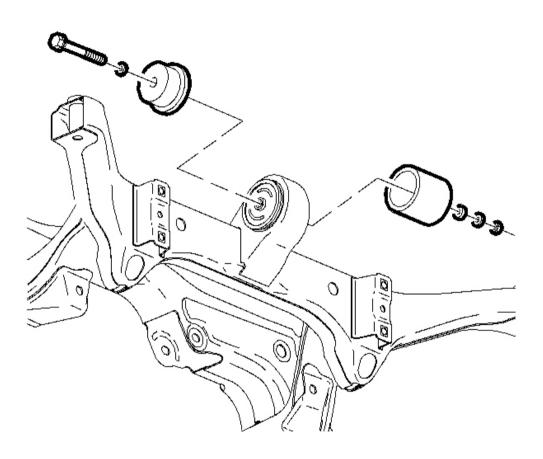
Installing The Bushing From Support Assembly Courtesy of GENERAL MOTORS CORP.
